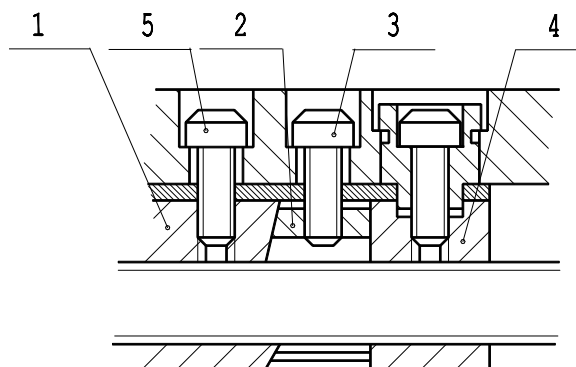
Adjustment of clearance between the leadscrew and the nuts
